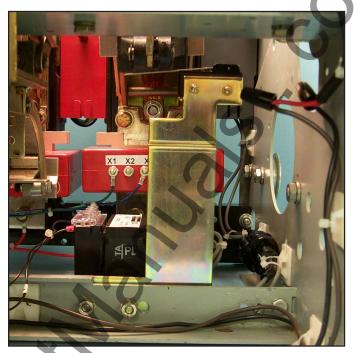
Auxiliary Switch and CPT Assemblies Installed in the Breaker.
